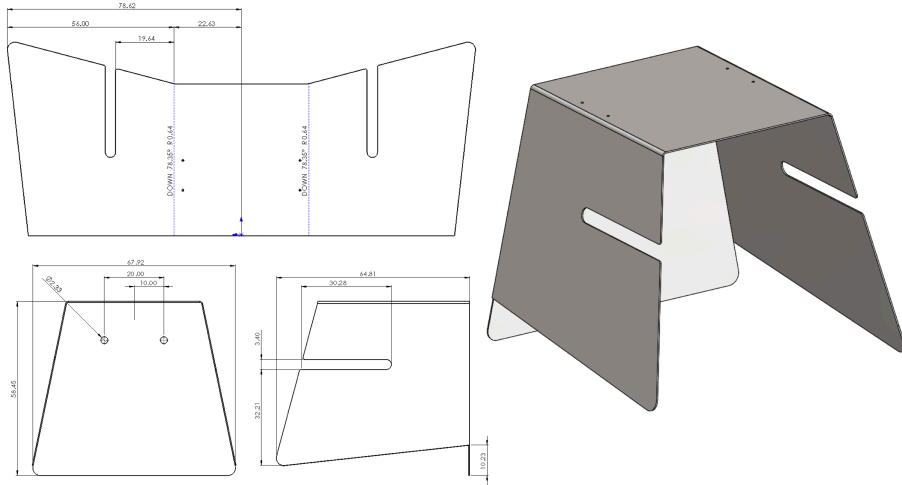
Dimensional drawing and 3D illustration of gurney version
